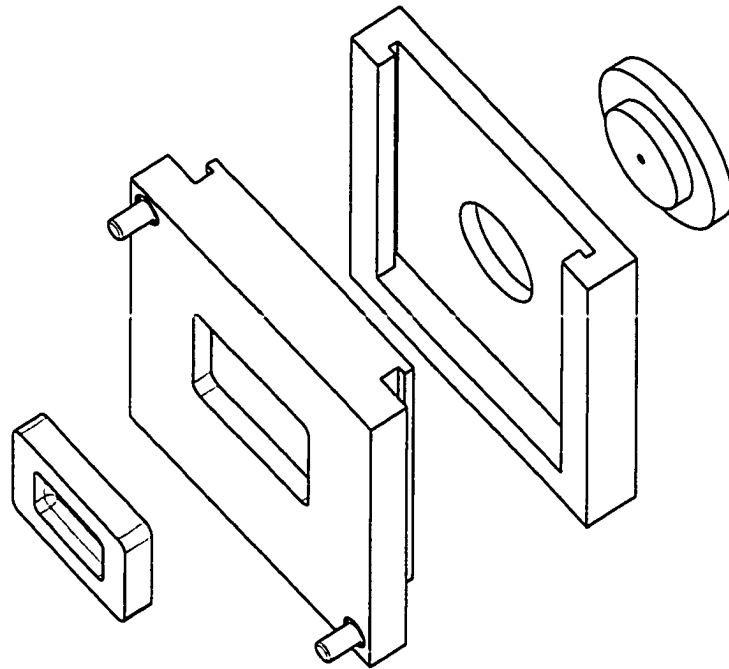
Components of the front half: Cavity insert, plate A, clamping plate and sprue bushing.
